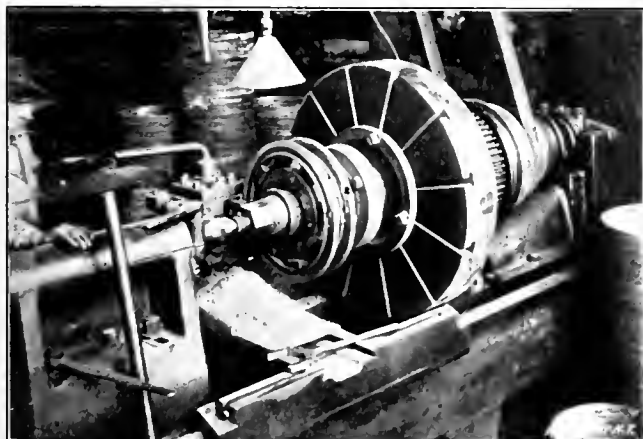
Finishing Two Piston Rings simultaneously on an Expanding Mandrel
